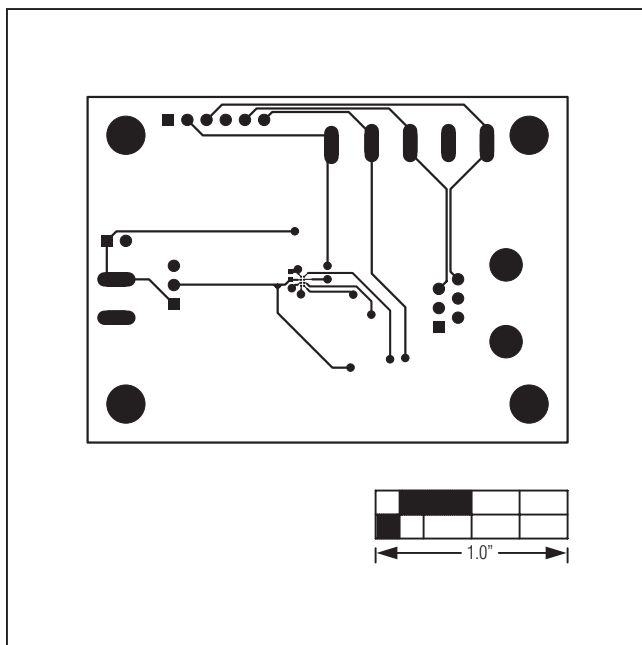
MAX17048X/MAX17049X EV Kits Component Placement Guide—Component Side
